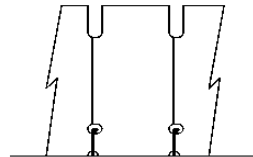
shows the principal block assembly method 4-2 adapted for bulb plate longitudinals, while figures 3.36 to 3.39 illustrate the seven options. The complementary option evaluation tables 3.36 to 3.42 are included as well.
